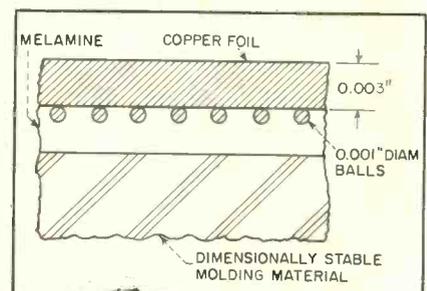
Cross-section of finished board, in which spheres anchor copper foil to melamine coating on phenolic molding material
